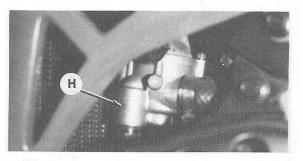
Thermostat is located within thermostat housing assembly (H).
